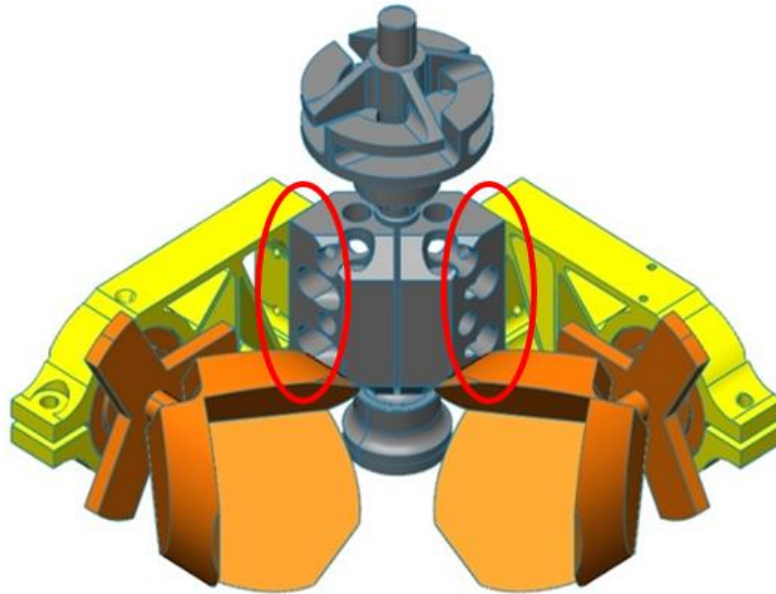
Pendulum arms and shaft assembly. In red, the region where the pendulum arms touch the shaft assembly.
